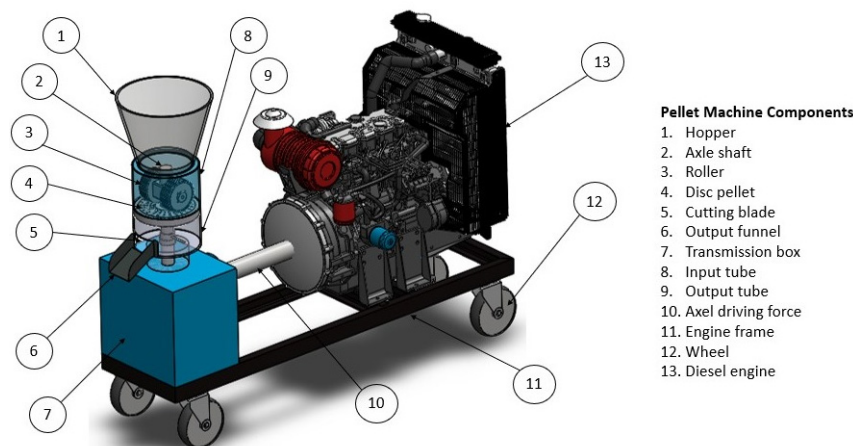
Draft of a machine for pelletising raw materials for roller-type sorghum biopellets
